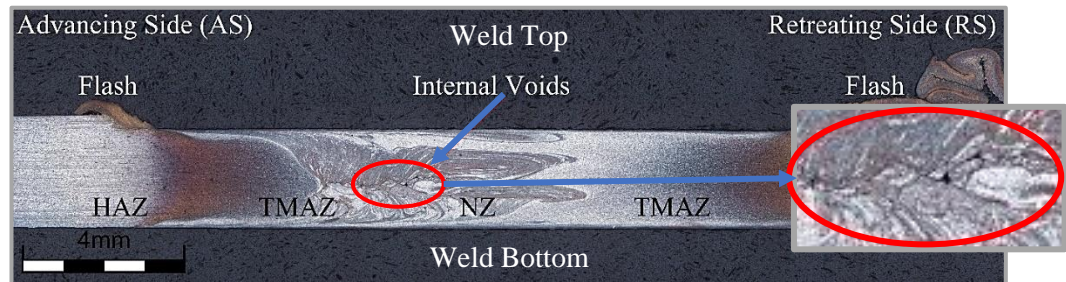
Tool 1 macrograph of “Weld 1.4”
